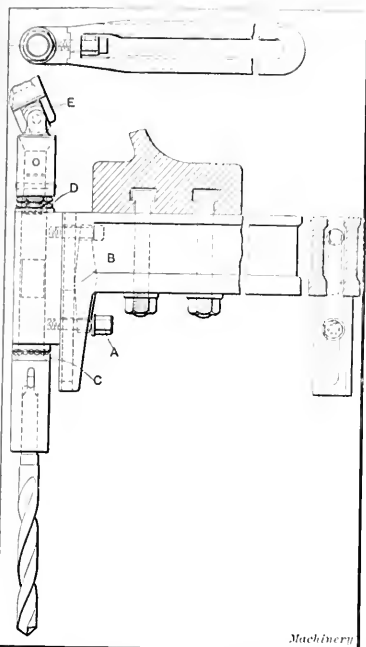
Quick-acting Device for making Vertical Adjustment of Spindle Bearings
